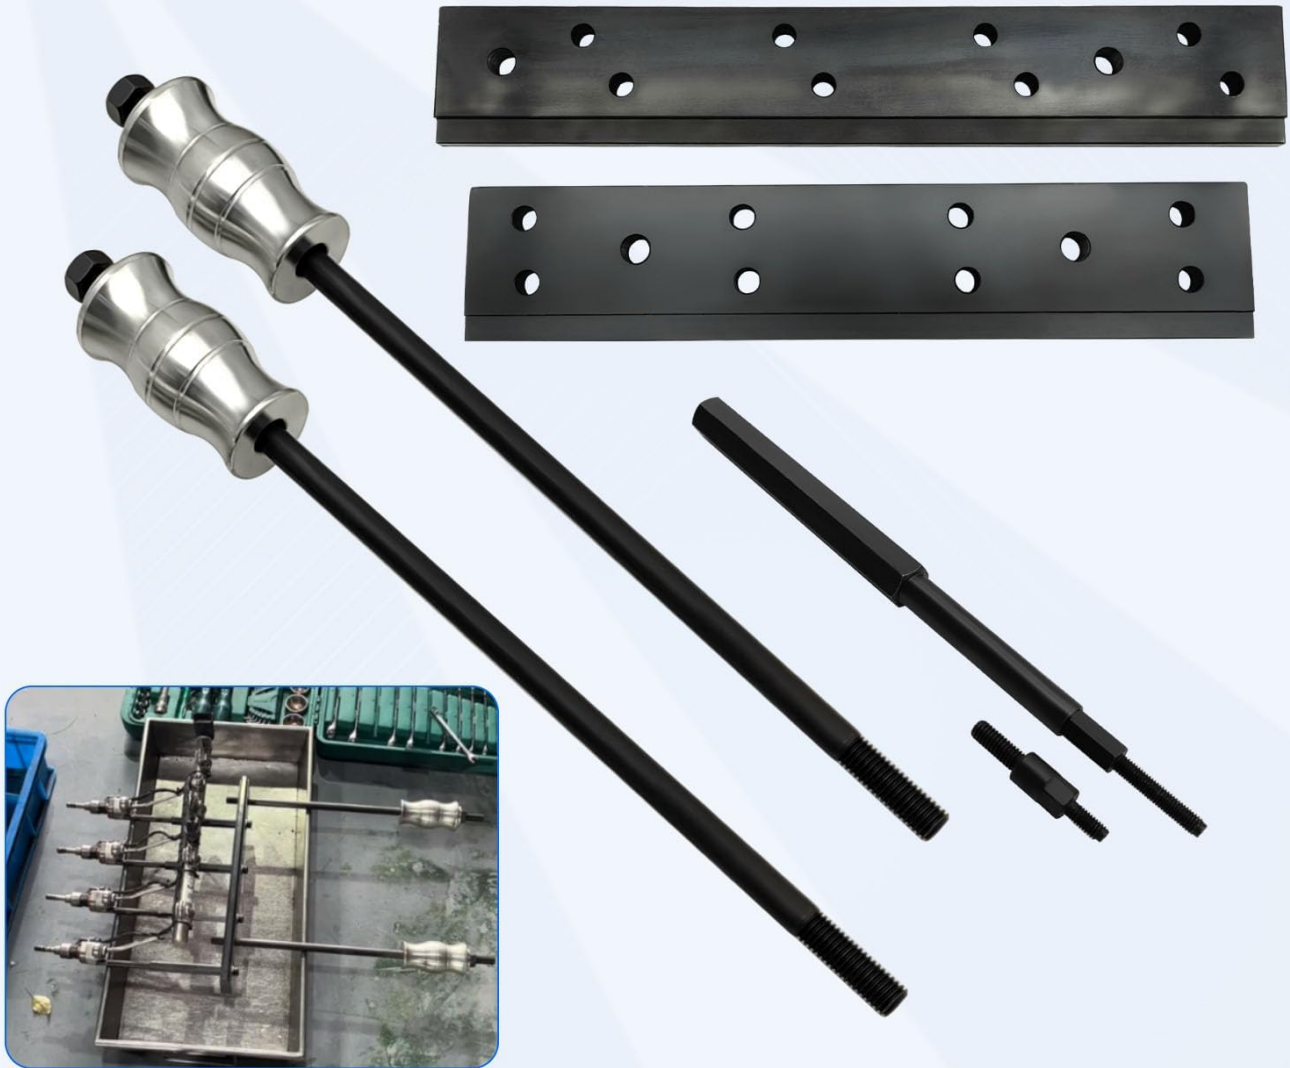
Components specifically designed for the rail assembly replacement, featuring robust puller rods and support blocks.
